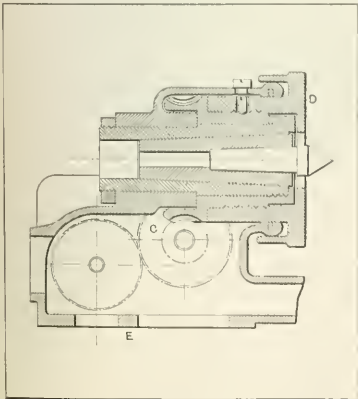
Cross-section through Driving Center showing Drive through Worm and Wheel C
